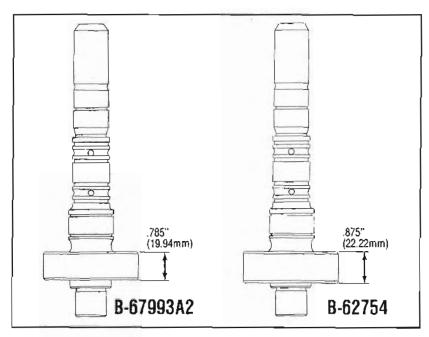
OUTPUT SHAFT IDENTIFICATION
